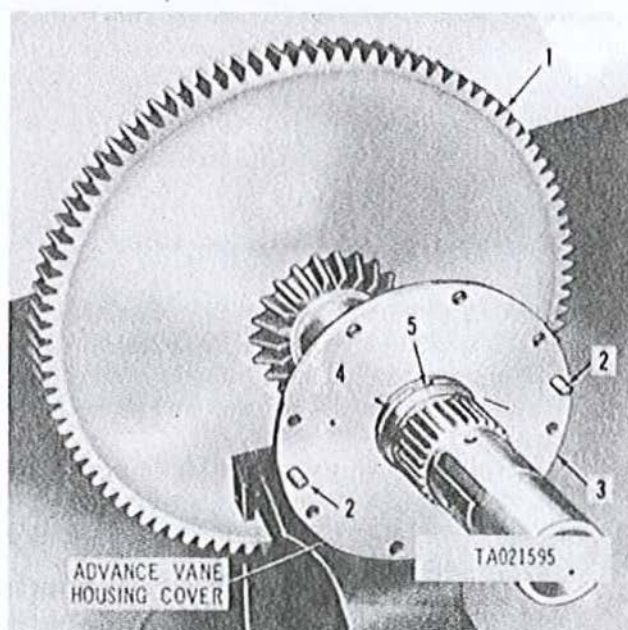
Pressing accessory driven gearshaft ball bearing on gearshaft.
